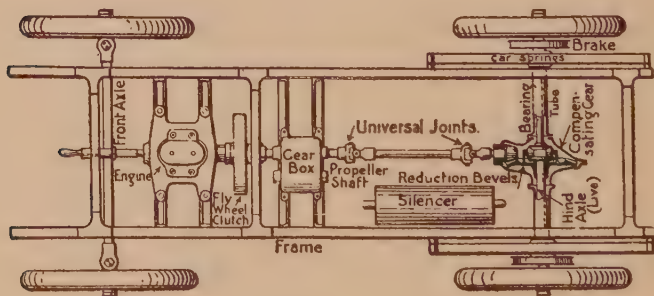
Chassis of an automobile. Plan showing arrangements of the parts of which the chassis is composed. They are, the frame, the power plant, the running gear, and the steering gear.
